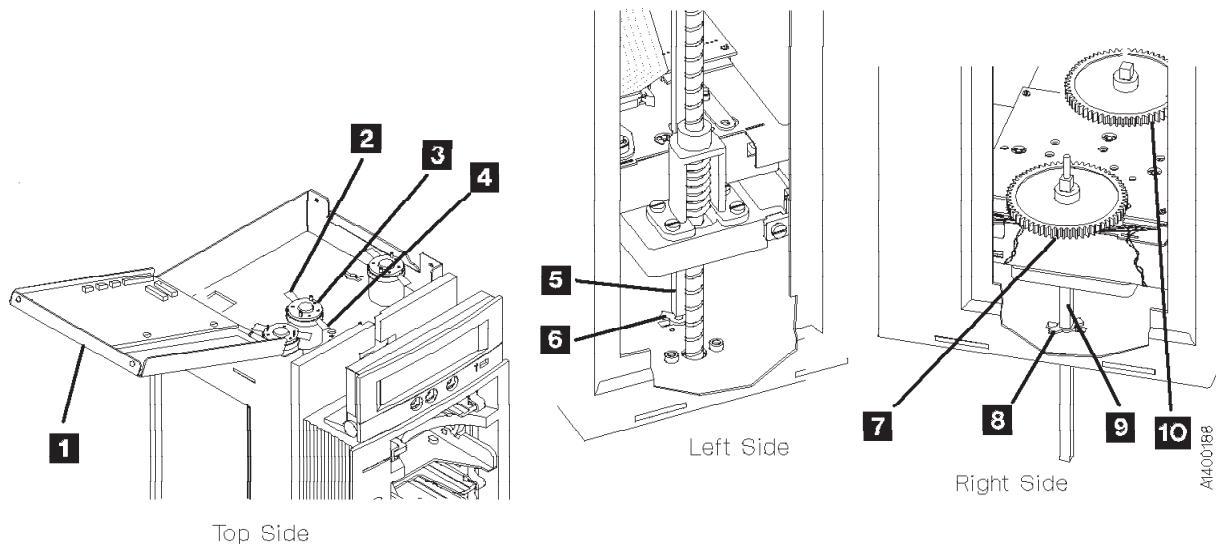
Feed Motor, Feed Shaft, and Pinch Shaft
